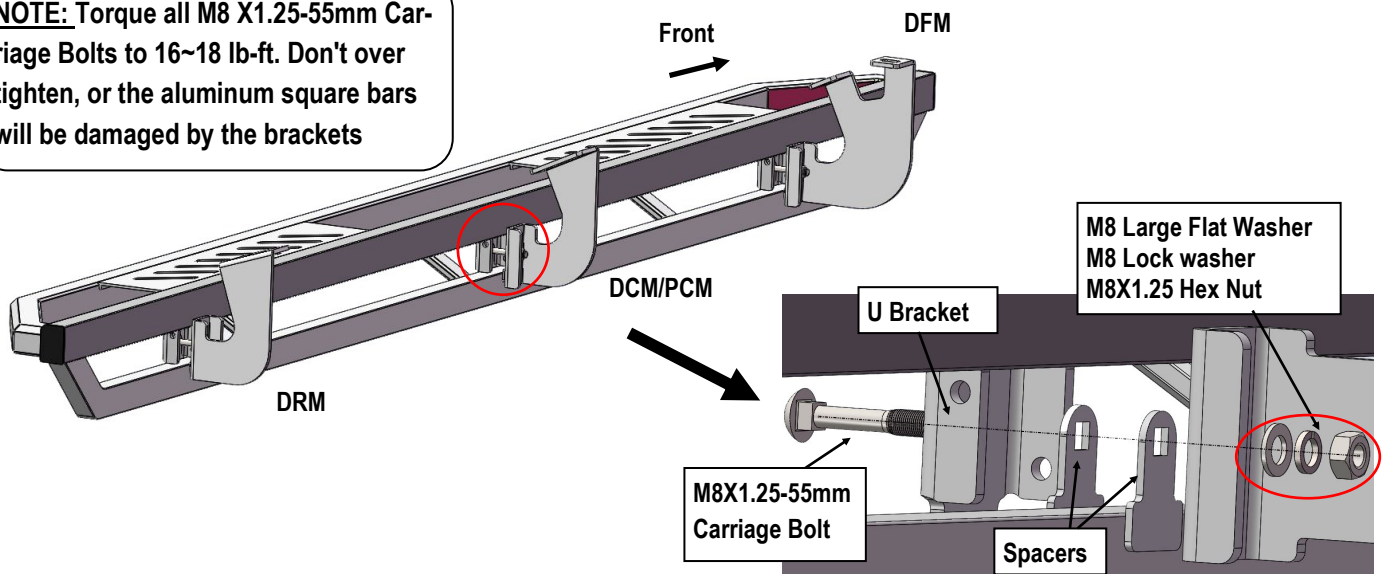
Driver Rear Mounting Bracket (DRM) Installed
